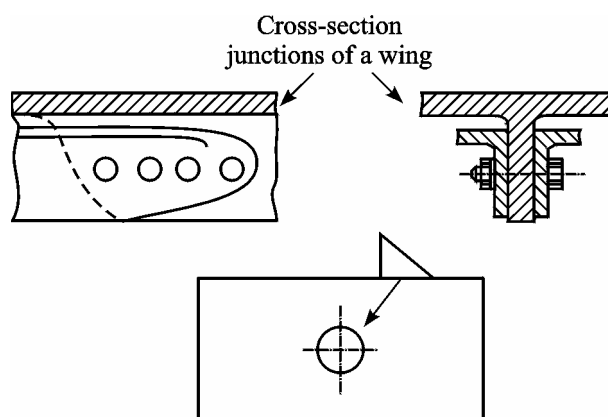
Two groups of bolted joints with radial clearance and schemes of ultrasonic testing
